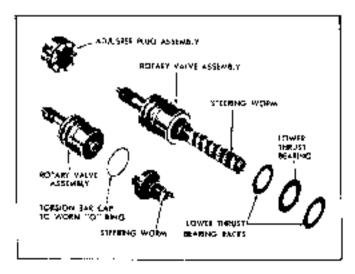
Adjuster Plug and Oliking Kemoval.
